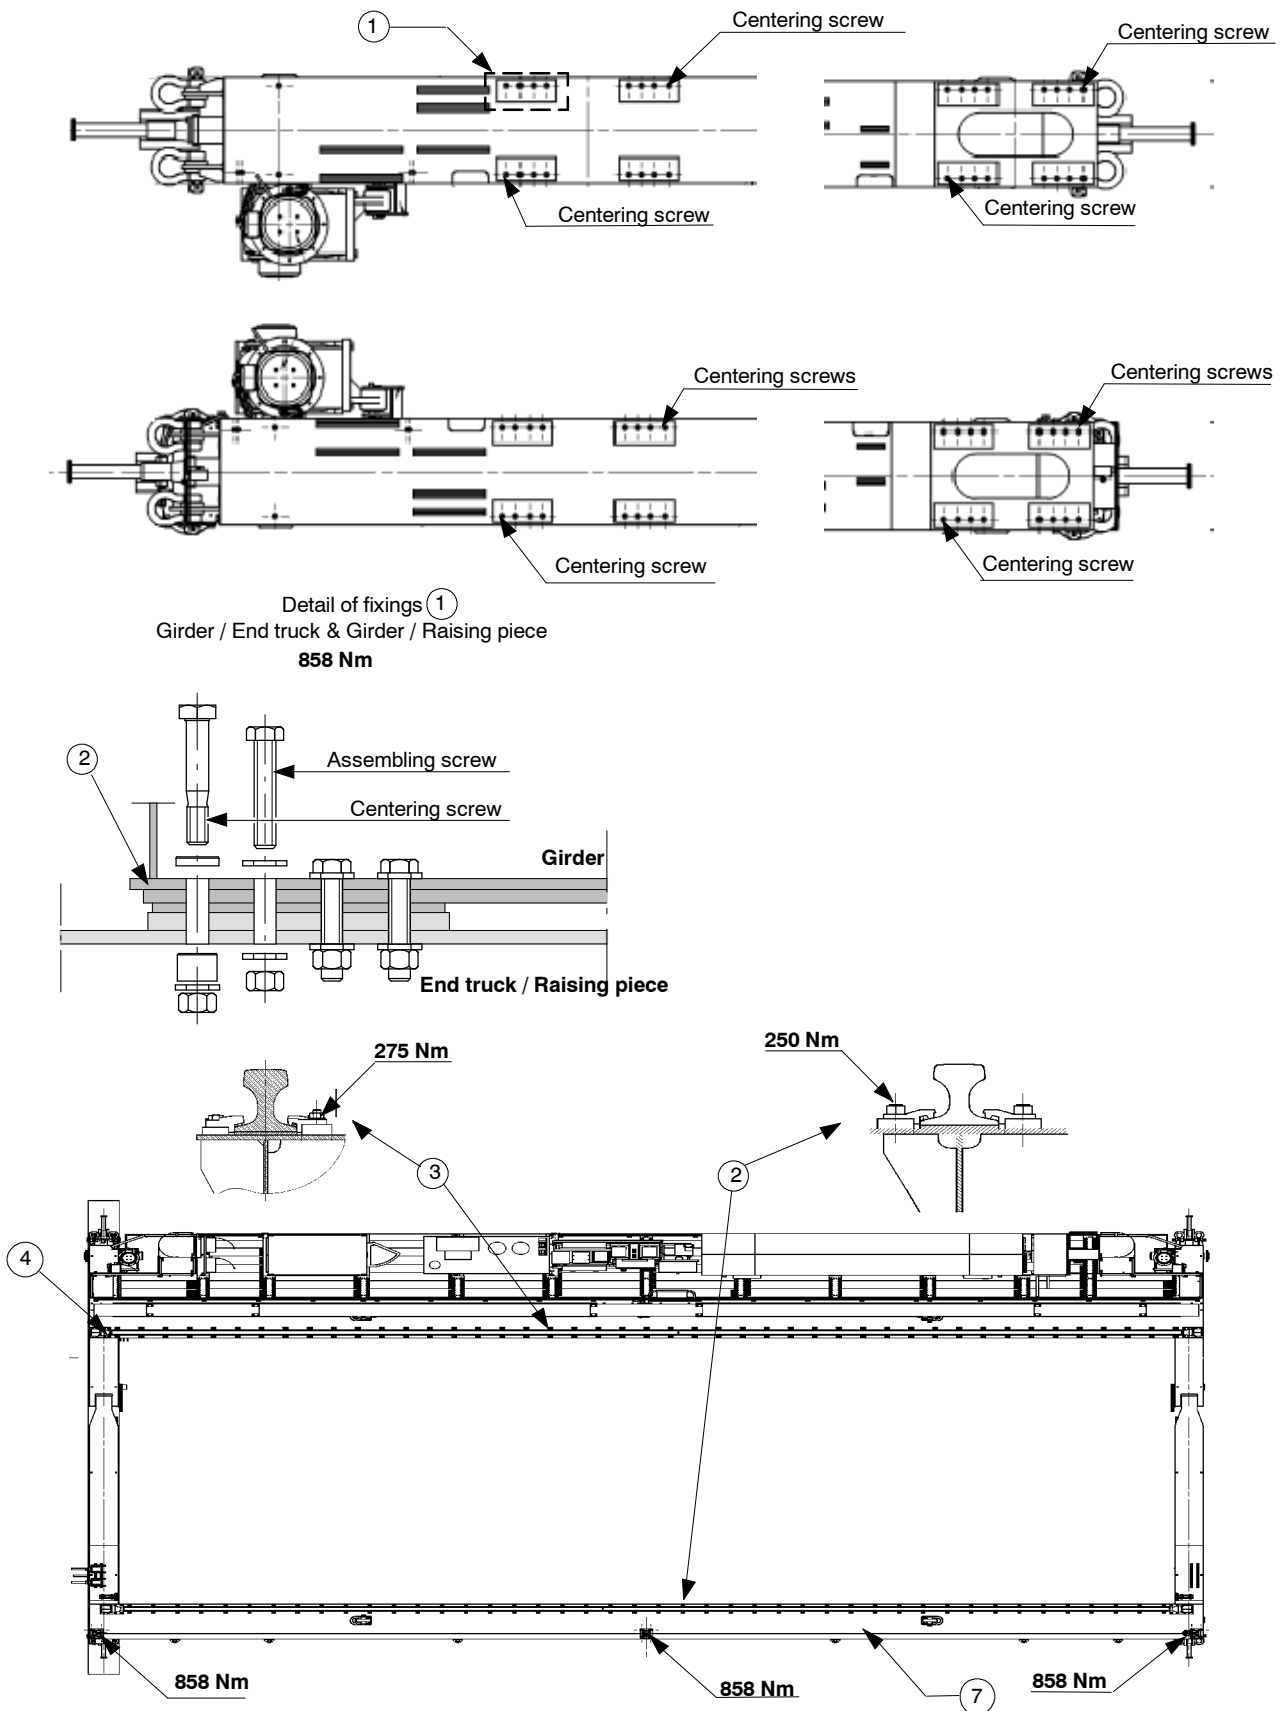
Detail of Girders / End trucks or Trailers fixing
